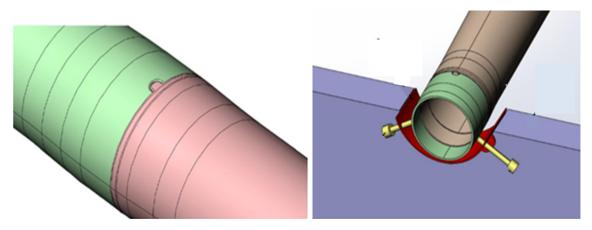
3D models of the dismountable flangeless connection (left) and the support scheme of the carbon beam pipe in the GEM beam hole (right).
